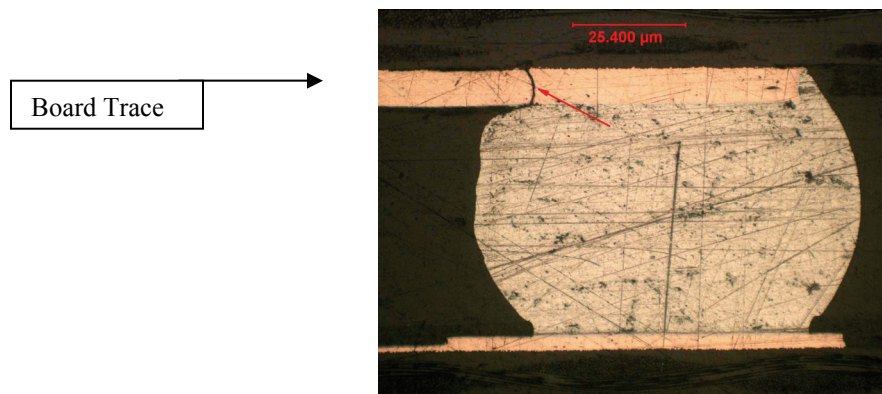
Tin Lead (SnPb) U44 PCB Trace 1R Failure
